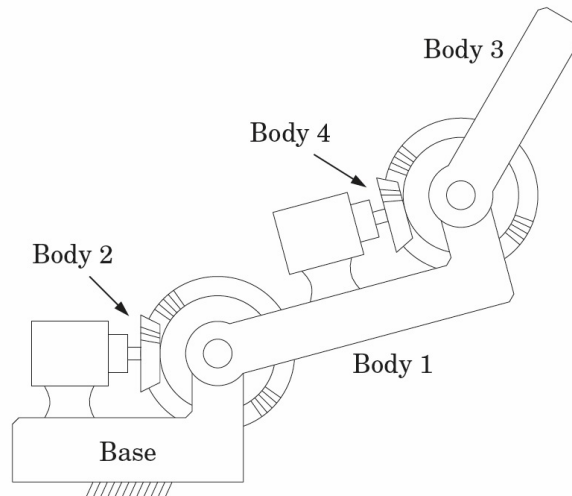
A two-link robot arm driven by gearmotors [37] ©2008 Springer.
